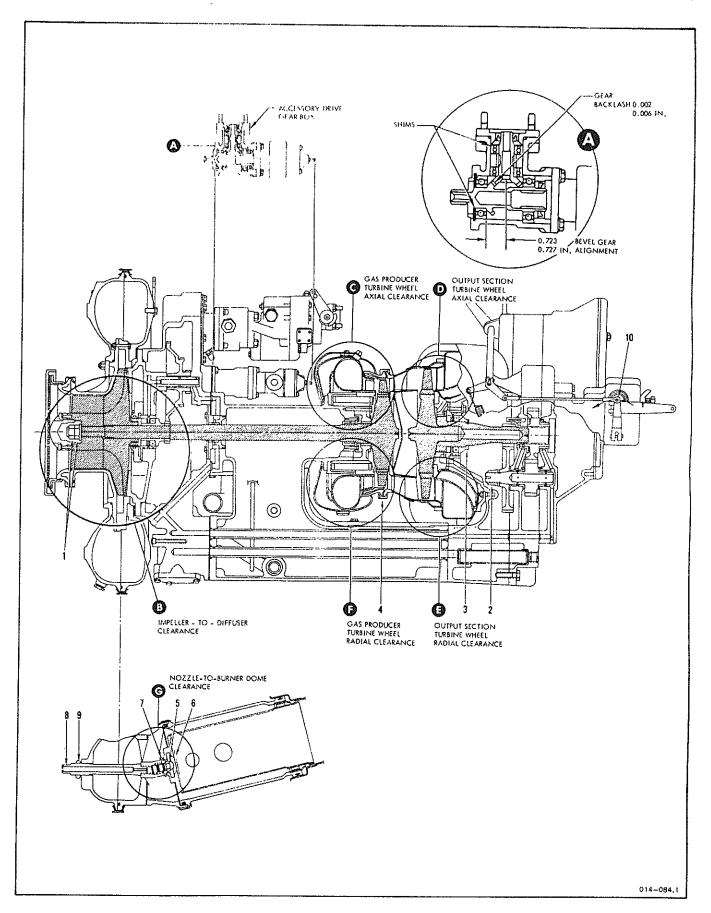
Engine Limits and Clearances (Sheet 1 of 2)
